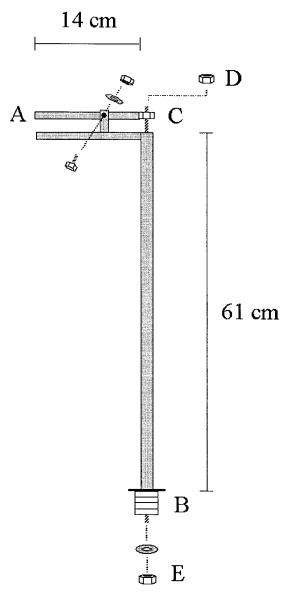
Schematic of pitfall retriever. When the trigger (A) is depressed, the rubber head (B) expands to grip the inside of the pitfall trap. The trigger has a nut welded to one end (C), through which a threaded rod is placed, and locked in position with a second nut (D). An additional nut (E) secures the lower end of the threaded rod to the rubber head. Figure is not drawn to scale.
